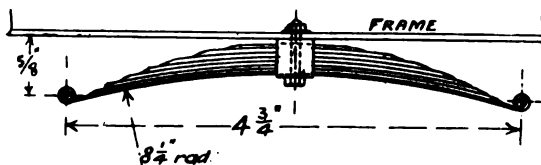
TRANSVERSE SPRING. (Half full size.)
